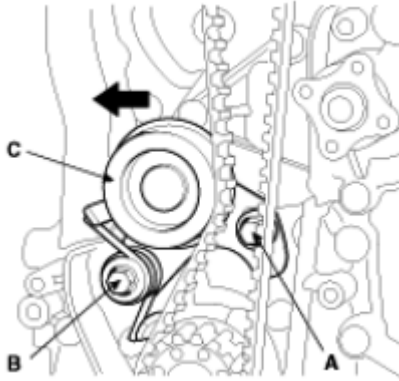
Locating Tensioner Pulley And Mounting Bolt
